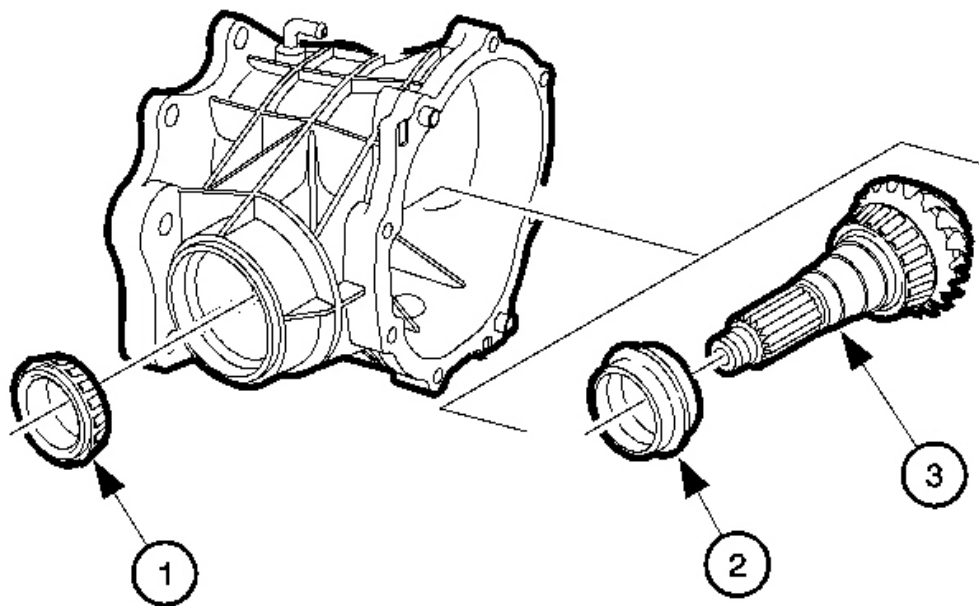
Removing/Installing Collapsible Spacer, Pinion Shaft & Bearing Onto The Pinion Shaft
